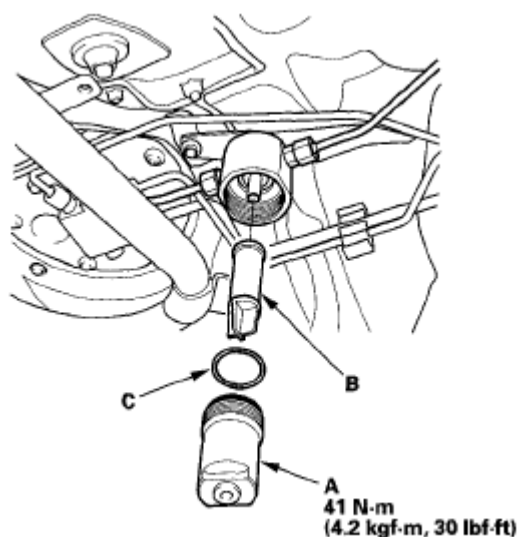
Identifying Fuel Filter A Housing, Fuel Filter A Element And O-Ring
